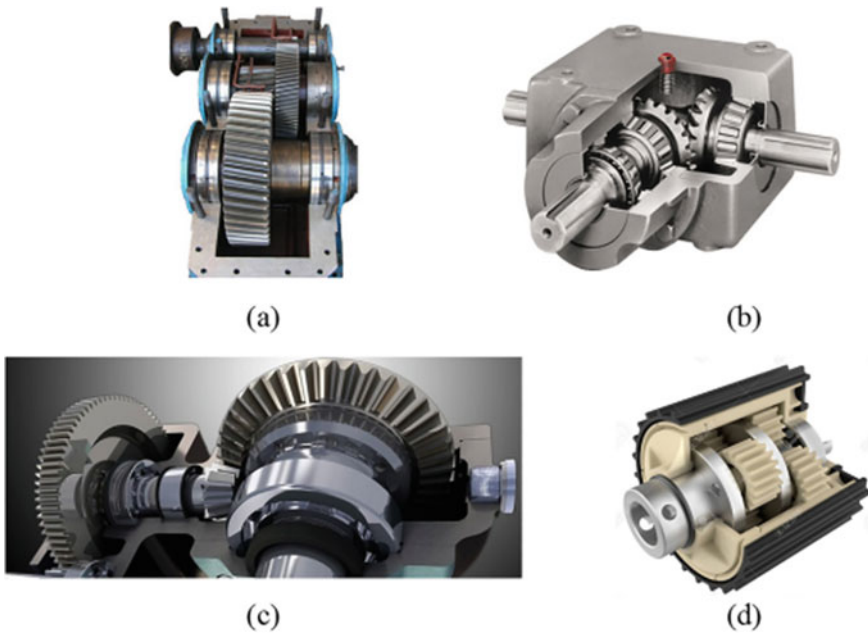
Various types of industrial gearbox: a helical, b bevel, c worm and worm wheel, d planetary [2]
